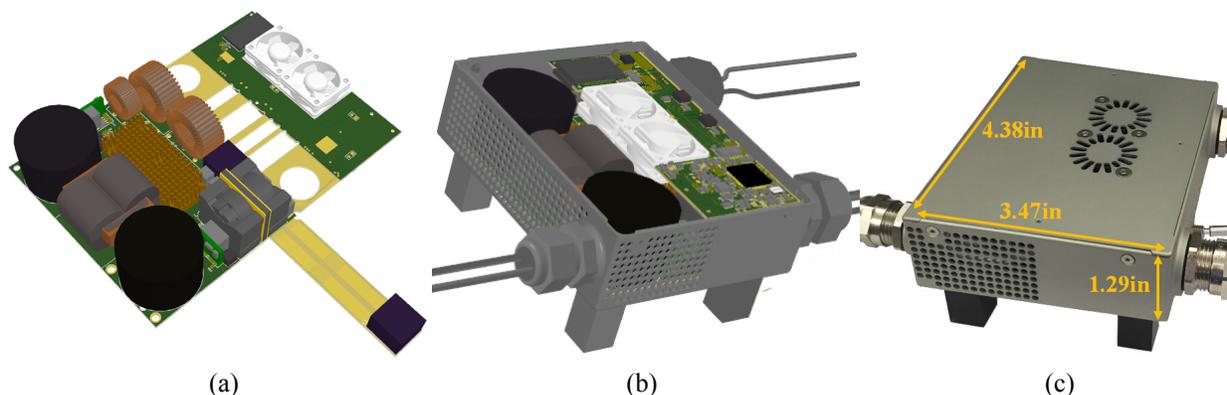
Rendering of PCB layout for the inverter (a) and inverter in enclosure (b); photo of final enclosed prototype system (c)
